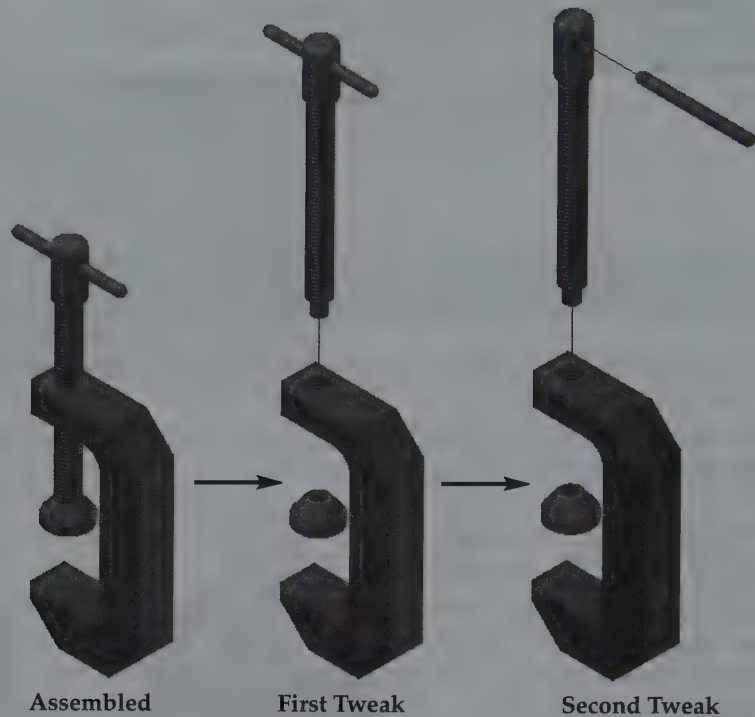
shows an example of selecting multiple components for the first tweak and a single component for the second tweak. In general, the first tweak includes the most components, and additional tweaks include fewer and fewer components until there are no more components to tweak. Pick the Trail Origin button and select a point on the assembly to identify the origin, or beginning, of the trail from which tweaked components originate. If you do not specify a trail origin, the trail begins at the selected component's center of mass. Select the Display Trail check box to show a trail.
